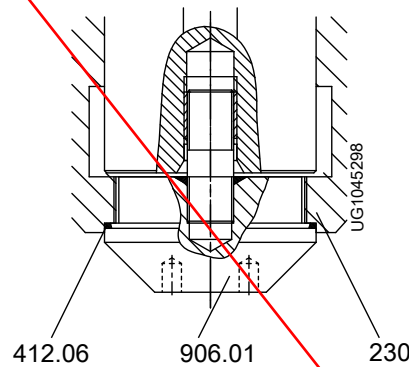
Impeller fastening elements M75 × 2 (for hydraulic system E 200-401), M100 × 2 (for hydraulic system K 350-710)
